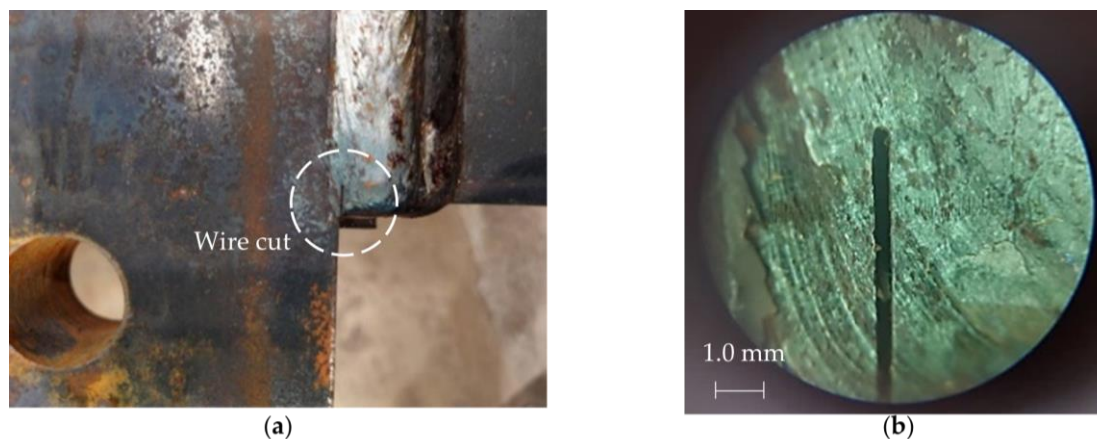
Tip radius of the wire-cut notch of the DTC specimen: (a) notch position and (b) magnified view.
